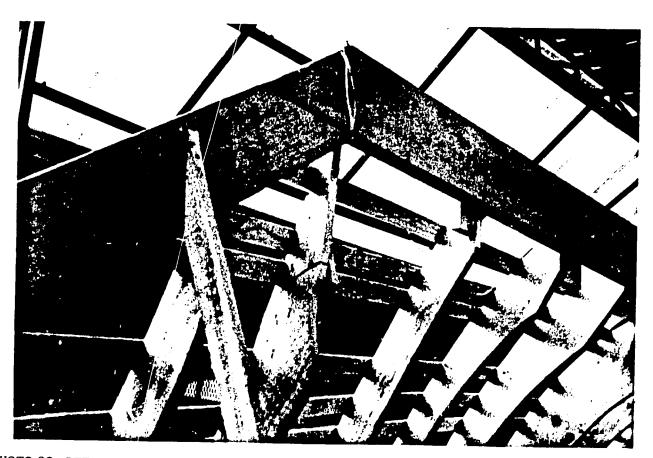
DETAILED VIEW OF BOW SECTION WITH ONE SIDE OF FRAMES AND FAIRING STRIPS IN PLACE
